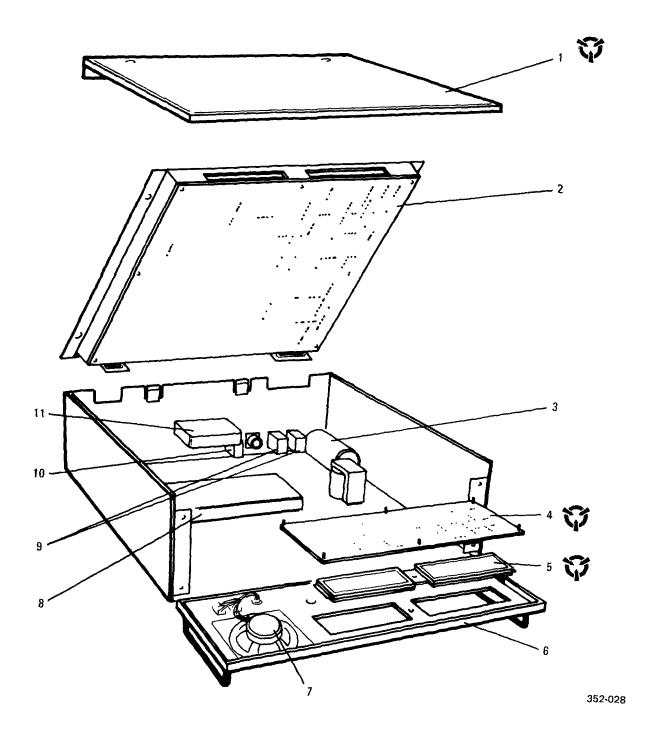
Remote Control Unit, C-11329/URC, Exploded View
